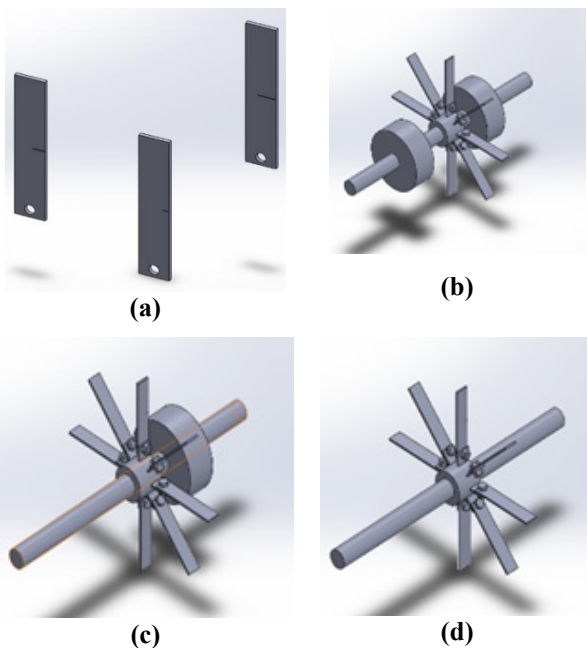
(a) Defective fan blades (b) Rotor with two loads (c) Rotor with one load (d) Rotor with no load
